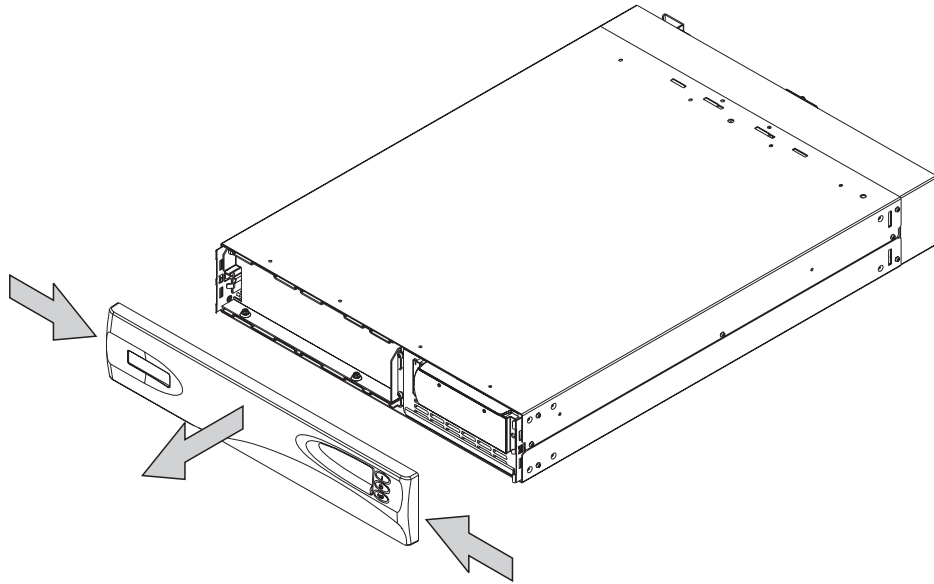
Removing the front panel of the 2145 uninterruptible power supply
